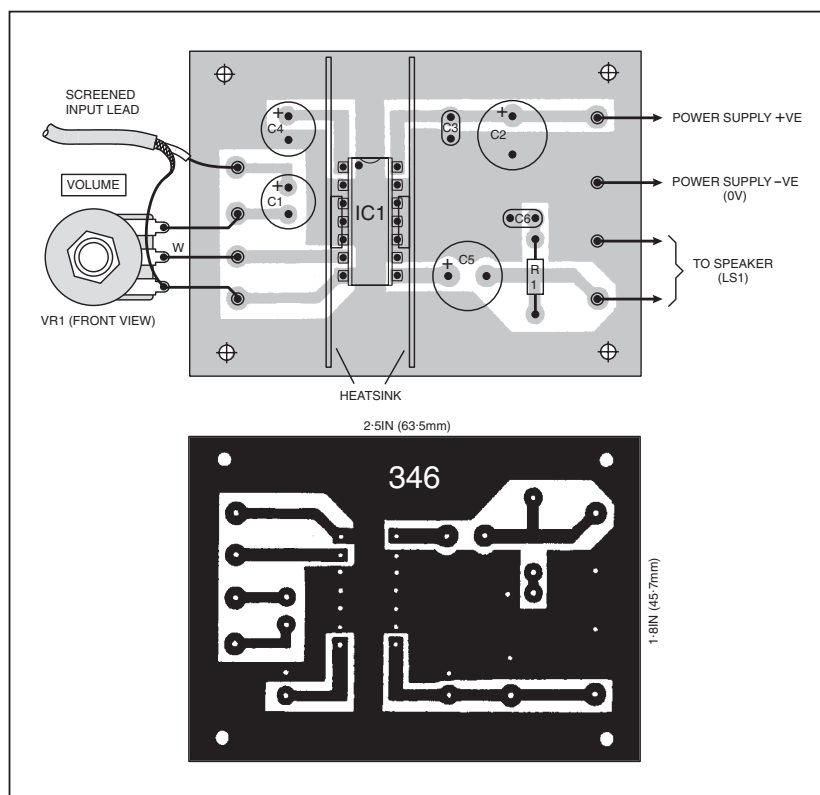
The LM380N printed circuit board component layout, off-board interwiring and full-size copper foil master pattern. Note the heatsinks.
